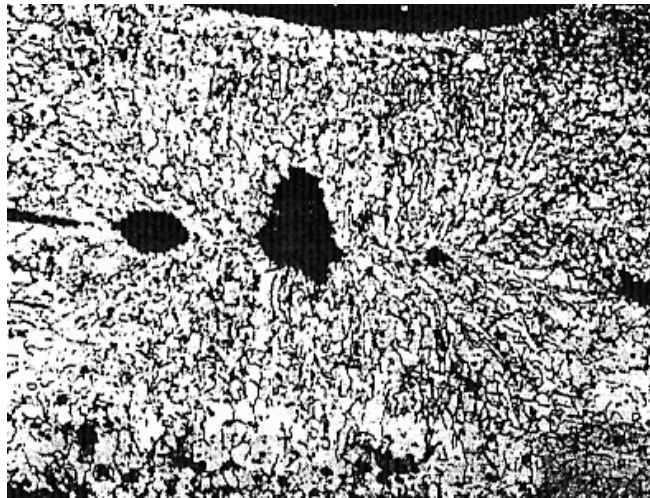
example of a blowhole found in an overheated weld made above the upper welding limit.
